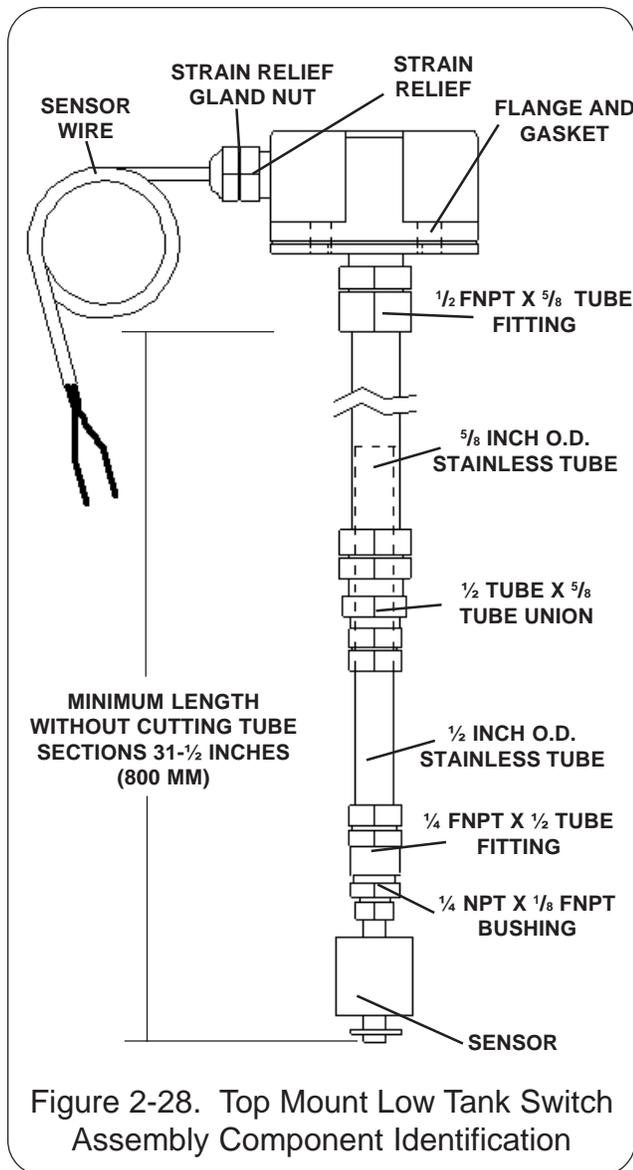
Top Mount Low Tank Switch Assembly Component Identification
